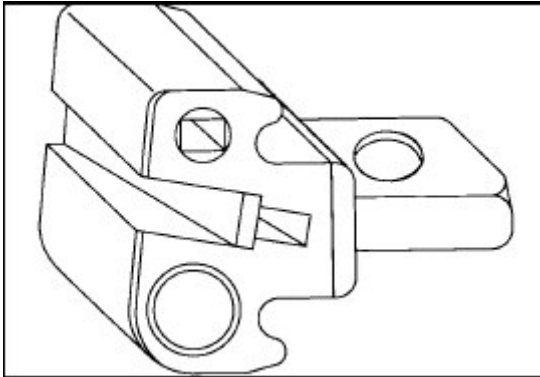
New molar attachment laser-welded to stainless steel bar.
